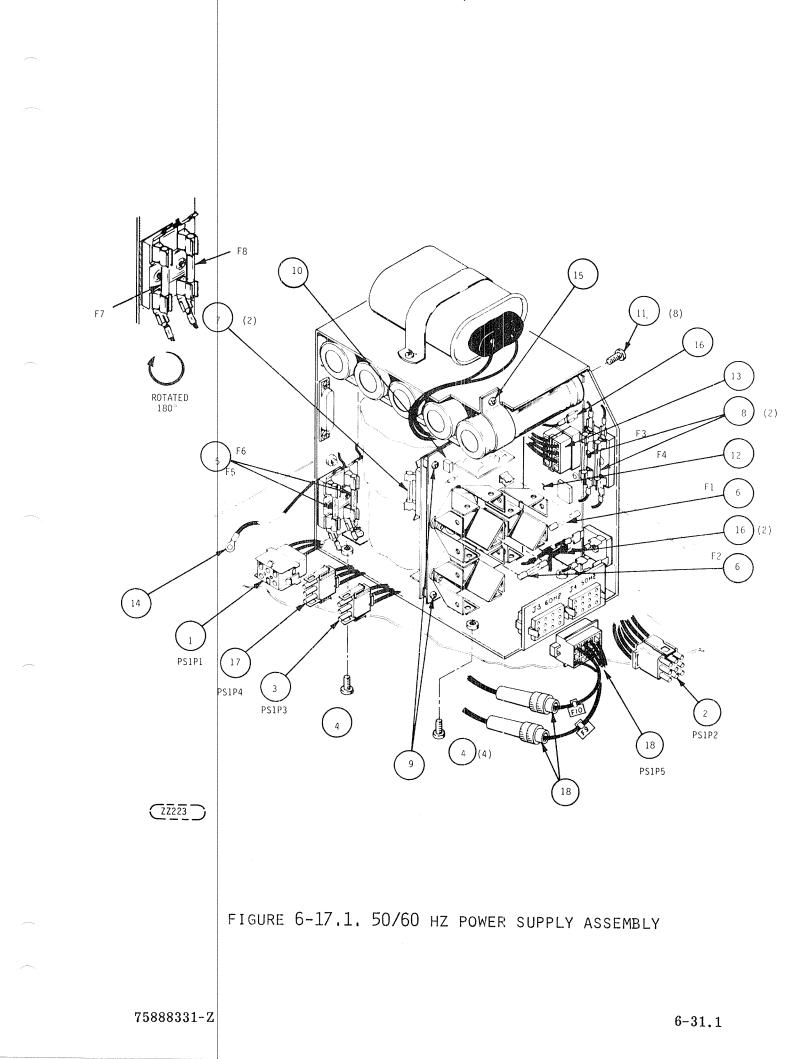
, POWER SUPPLY ASSEMBLY
